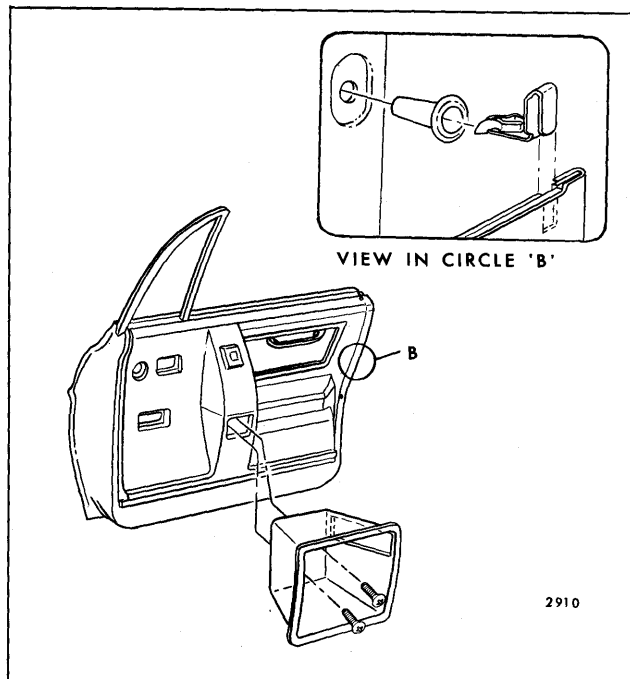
Door Trim Assembly with Integral Arm Rest - Pontiac Shown, Cadillac Similar
